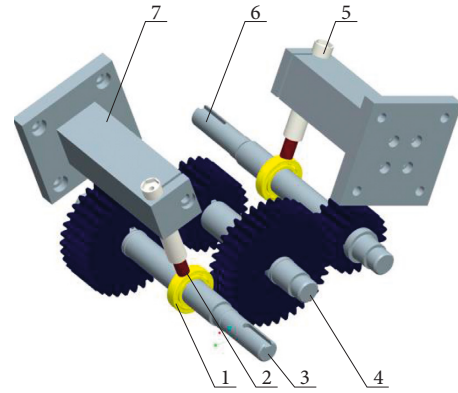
A detailed view of the internal structure of active control. (1) Support bearing. (2) Antiloading rod. (3) Output shaft. (4) Intermediate shaft. (5) Piezoelectric actuator. (6) Input shaft. (7) Actuator bracket.
